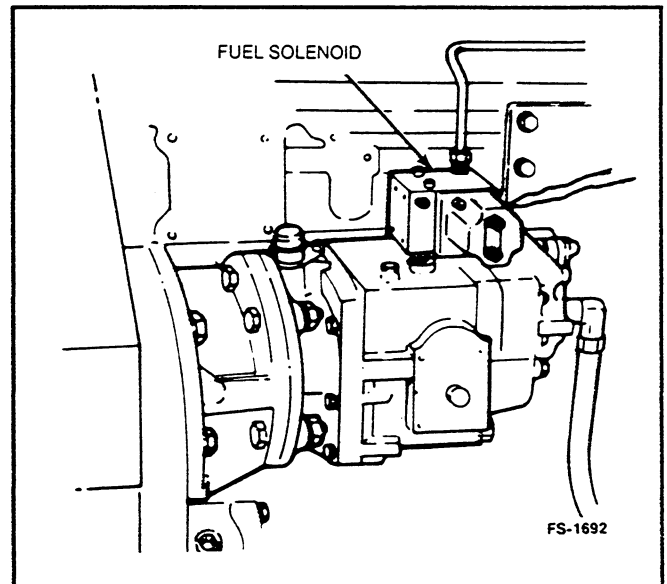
FUEL SOLENOID VALVE LOCATION
